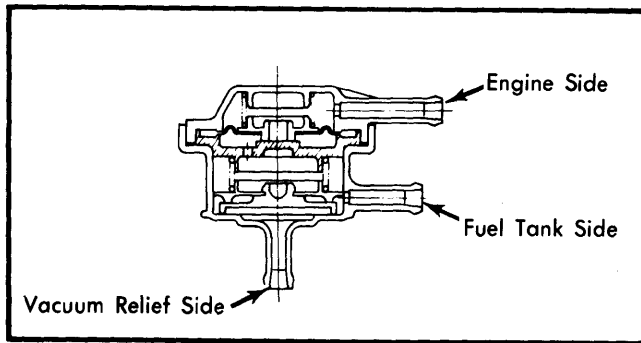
Check Valve With Vacuum Relief Valve (310)
